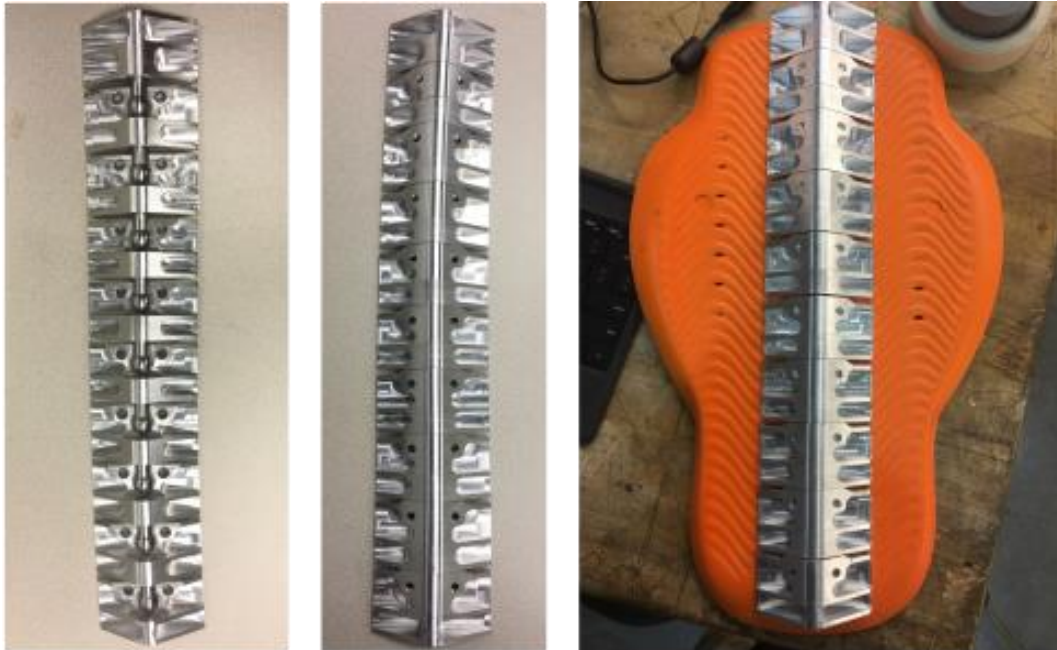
ScarabSpine assembly with ball sockets exposed, base caps installed, and sewn to Viper Pro pad.
